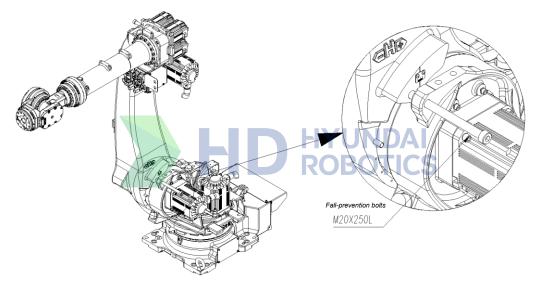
Position for Inserting the Fixing Bolt for the Primary Arm (H Axis)
